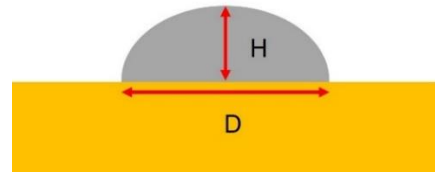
Side view schematic of solder spread on Cu; D: solder bump spread diameter post reflow; H: solder ball height post reflow.
